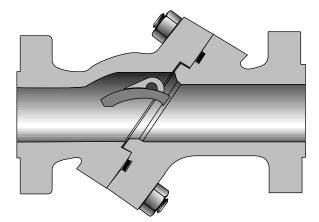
Flanged Figure 623¹/₂ Butt Weld
